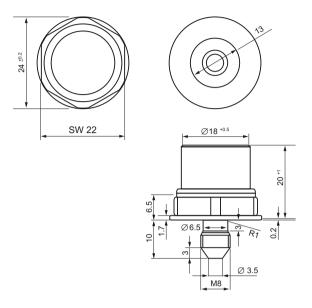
Dimensional drawing of MDS D528 All dimensions in mm
